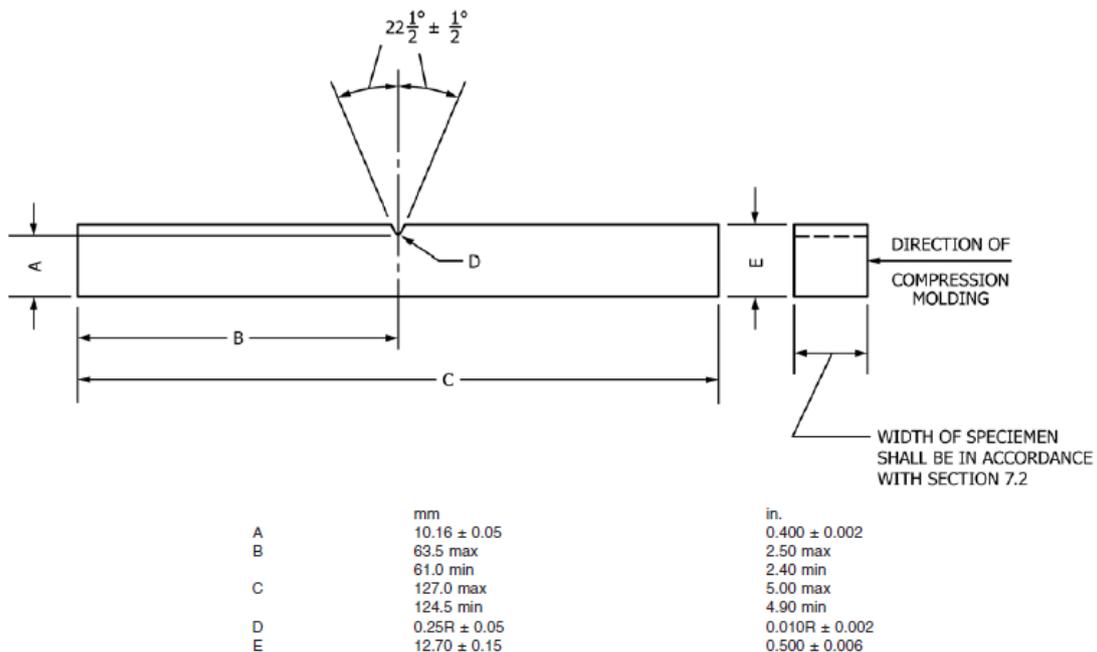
ASTM D6110-10 Charpy Impact Test Specimen Size [11][12].
